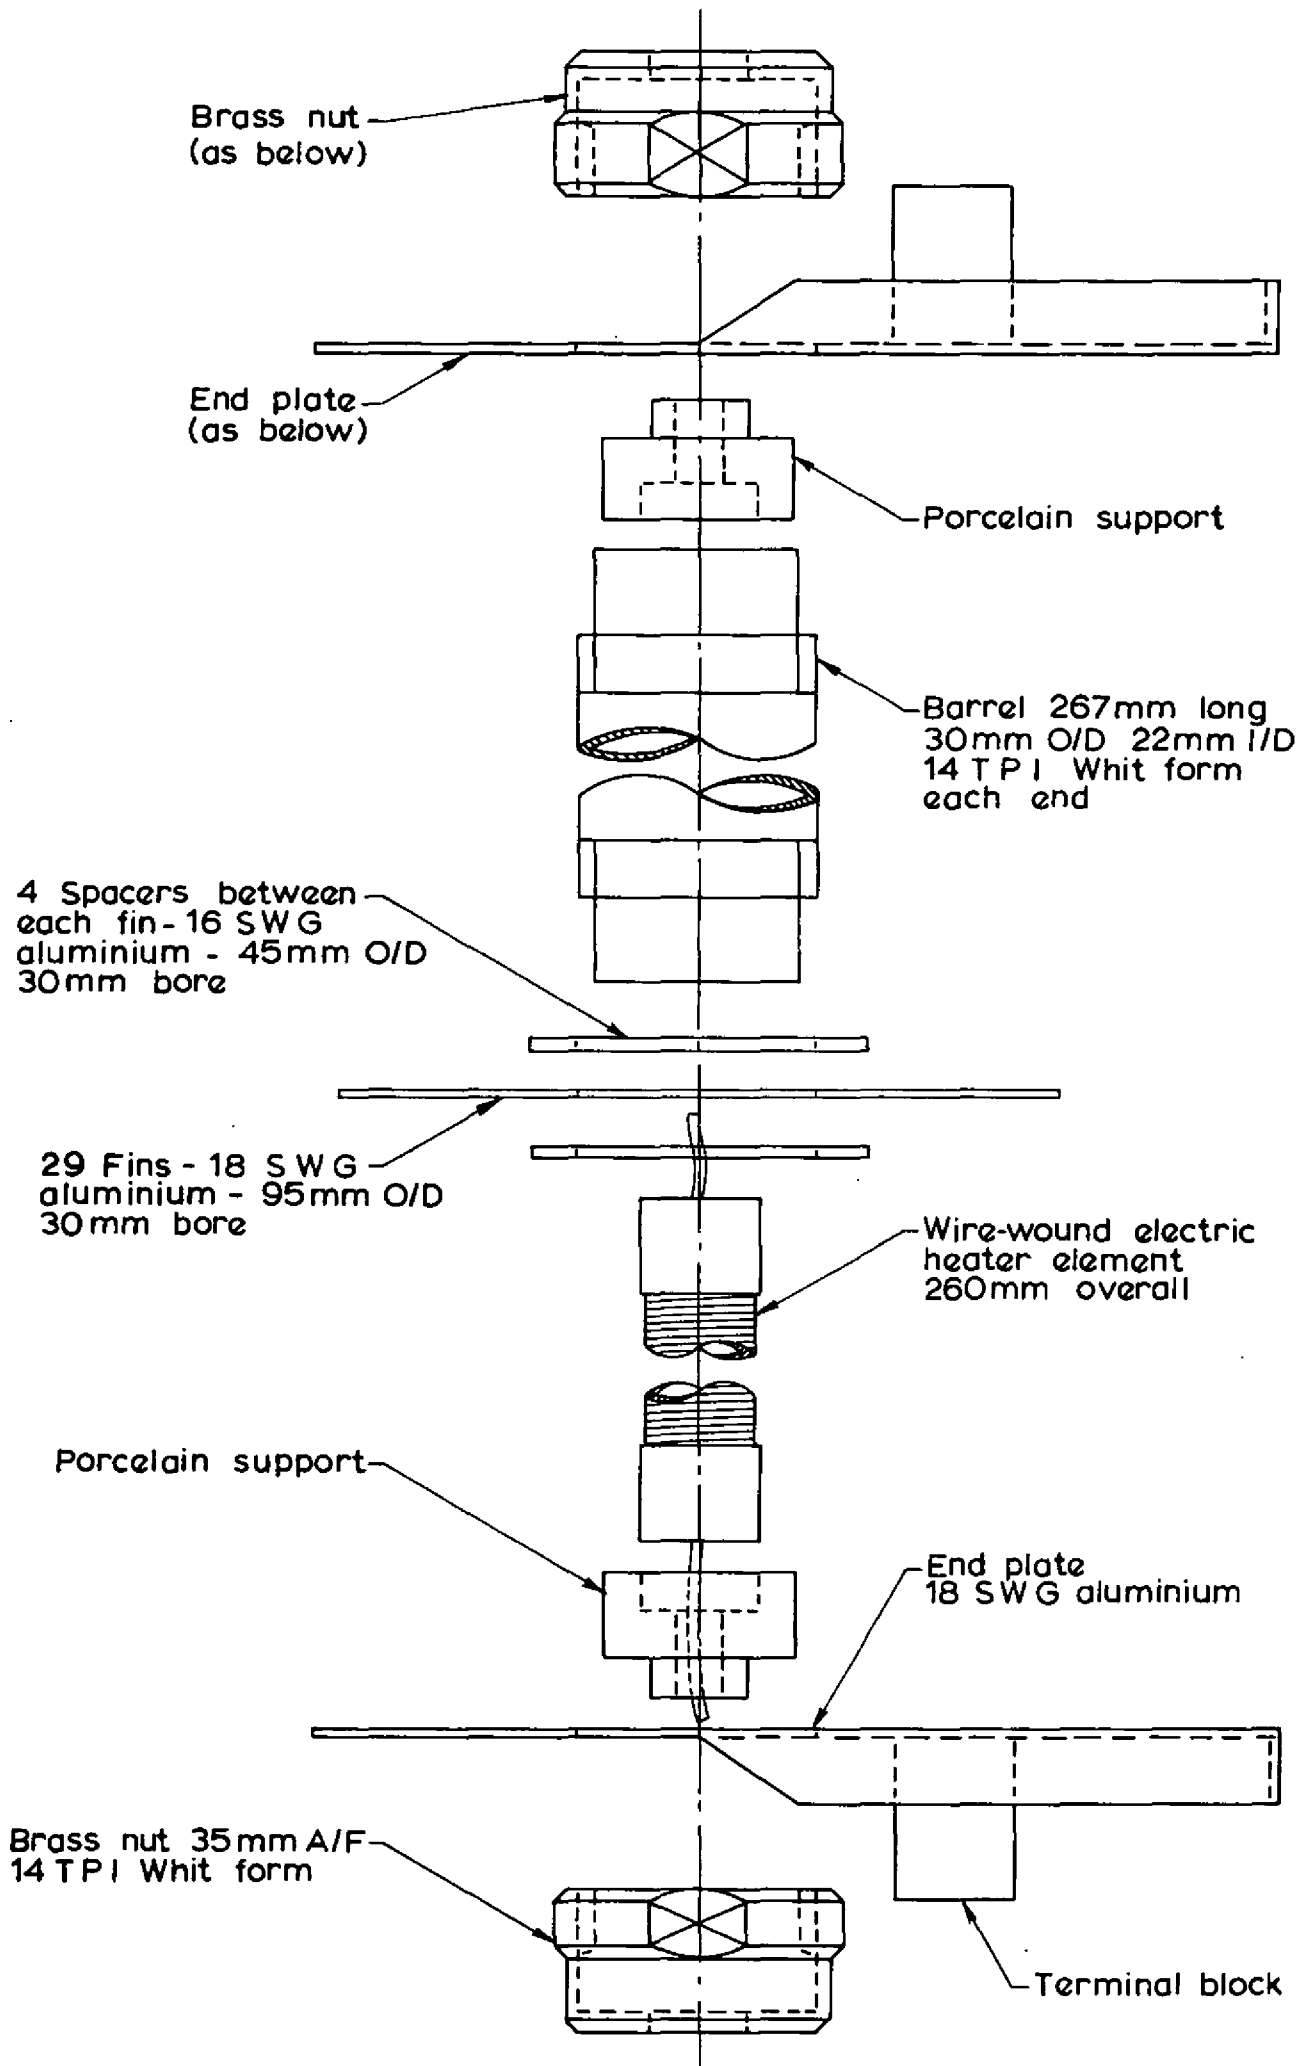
A. EXPLODED VIEW OF CONVECTOR HEATER (286 MM LONG)
